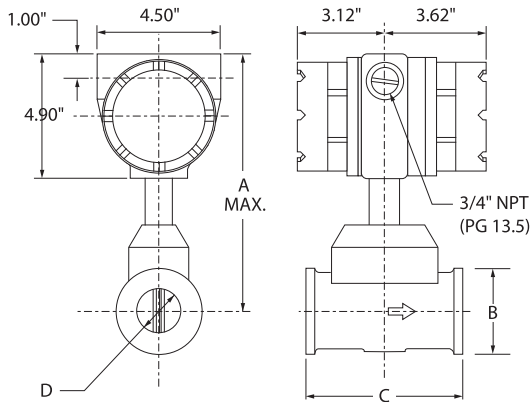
Dimensions: Wafer Connection Type, Integral Mounting.
